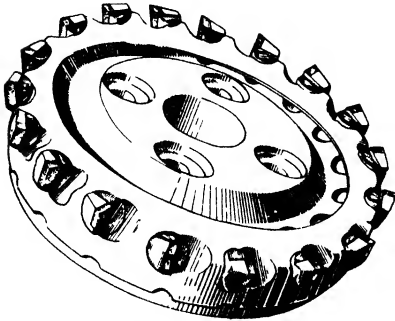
A Heavy-Duty, Inserted-Blade Face Mill
